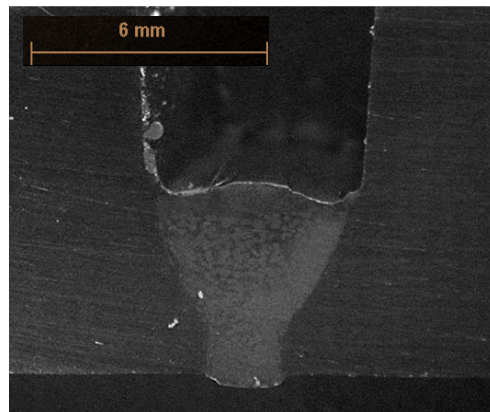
Weld bead obtained for GMAW-P using WFS = 10m/min; TS = 0.83m/min; and 1.5%CO₂54%He44.5%Ar.
